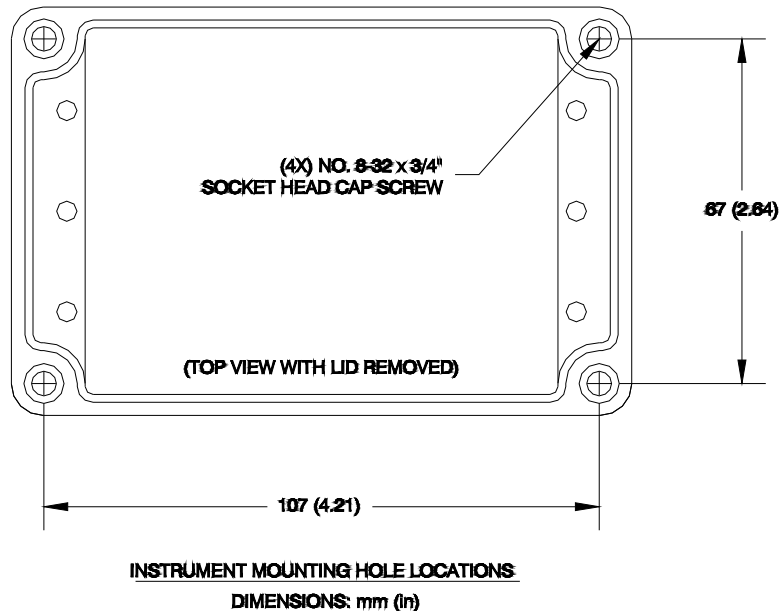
Mounting holes are accessed by removing lid of tiltmeter.
